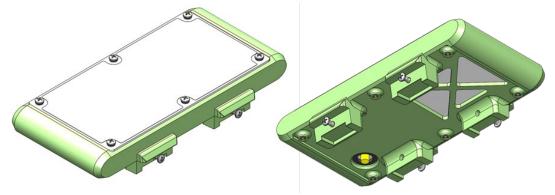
Example MP-compliant 4-pt Antenna Adaptor Assembly
